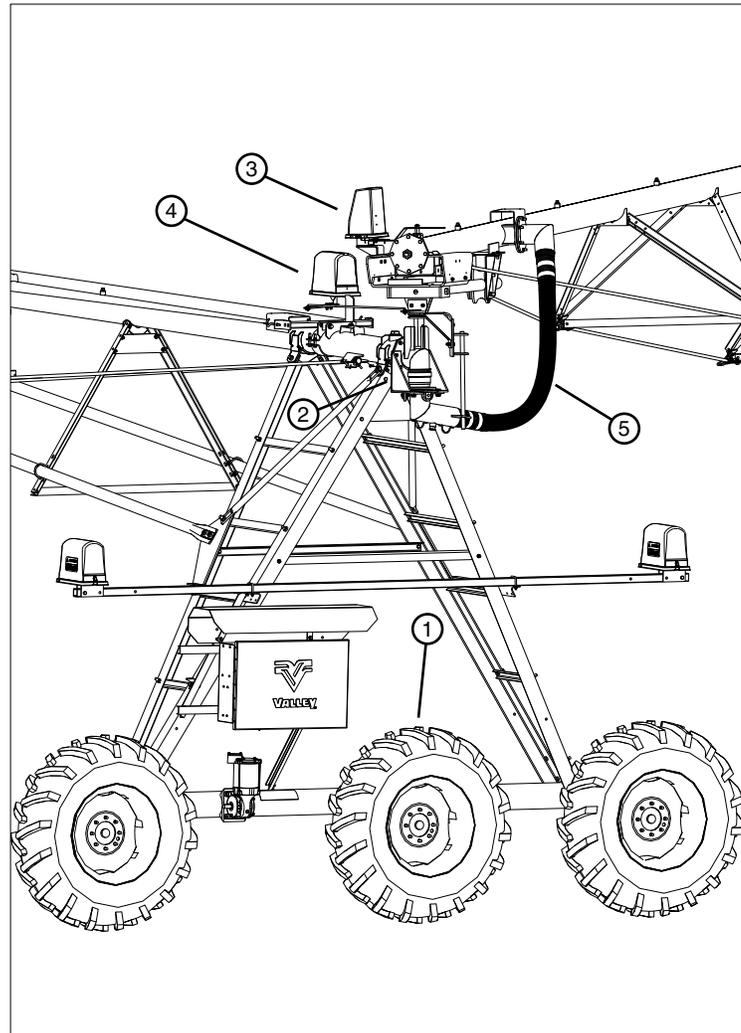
1. 3 Wheel Base Beam 2. Swivel Inlet 3. Run Cycle Box 4. Guidance Tower Angle Sensor Box 5. Flexible Hose
